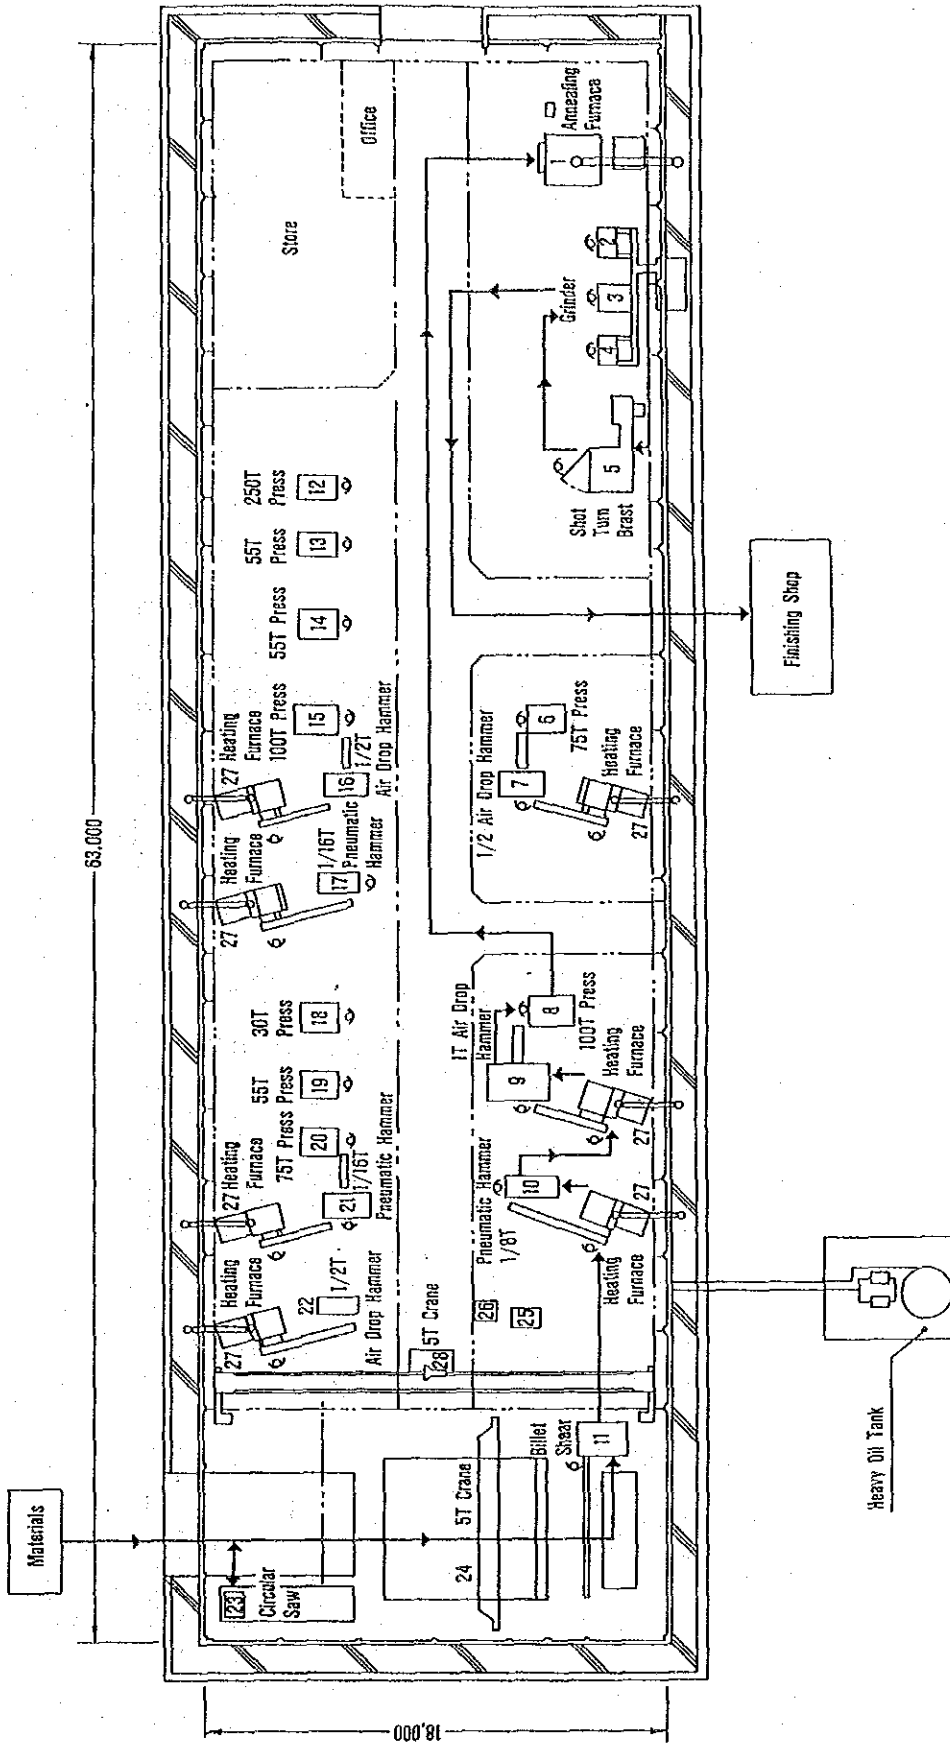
MACHINE LAYOUT PLAN OF MAMOOTIE FORGING SHOP
